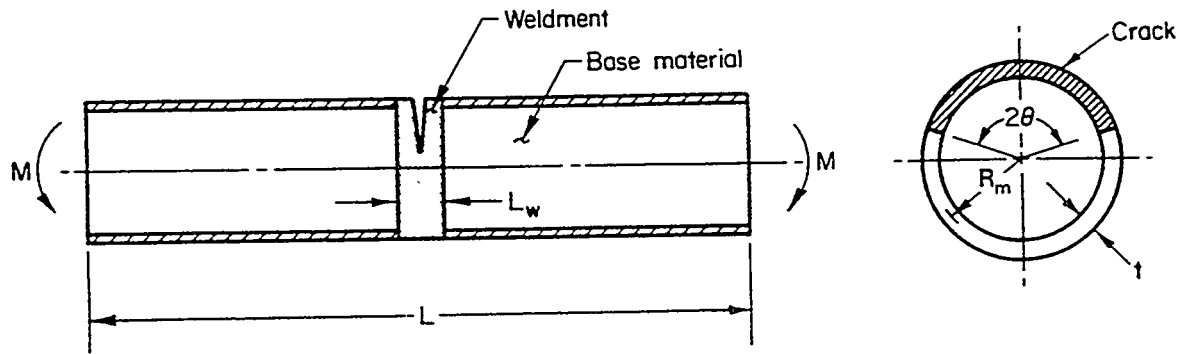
Schematics of pipe weldments with a circumferential flaw
